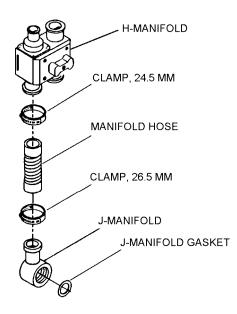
Assembling Right Manifold Hose to H-Manifold and J-Manifold
